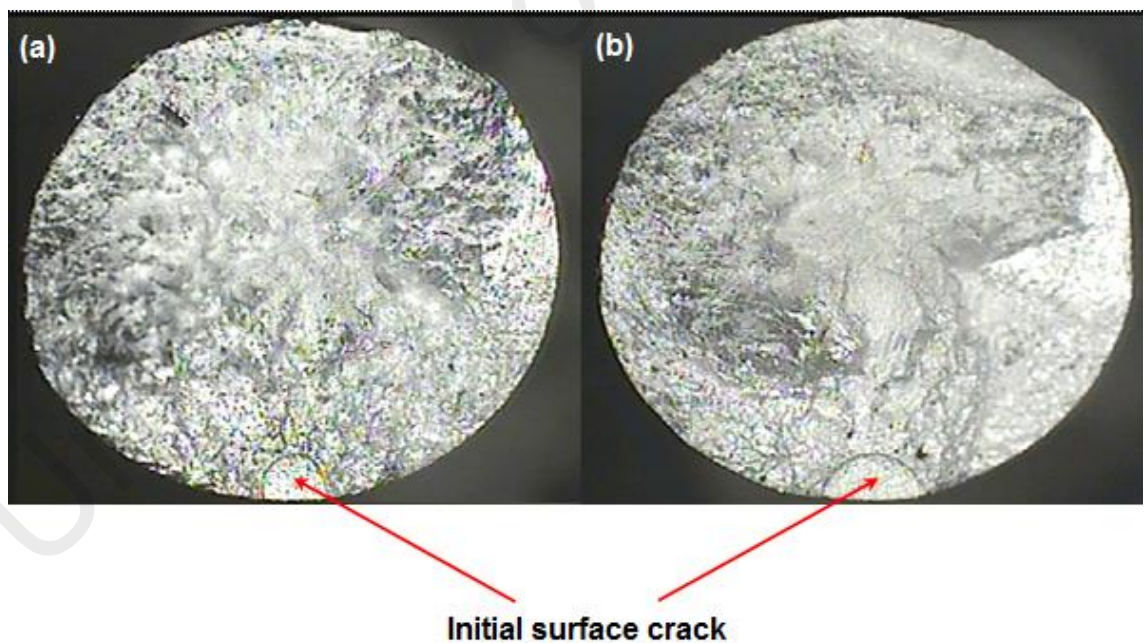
Shapes of surface crack prepared using the die-sinking EDM machine after fatigue crack test (a) $a/c=1/0.5$ mm (b) $a/c = 1/1$ mm
